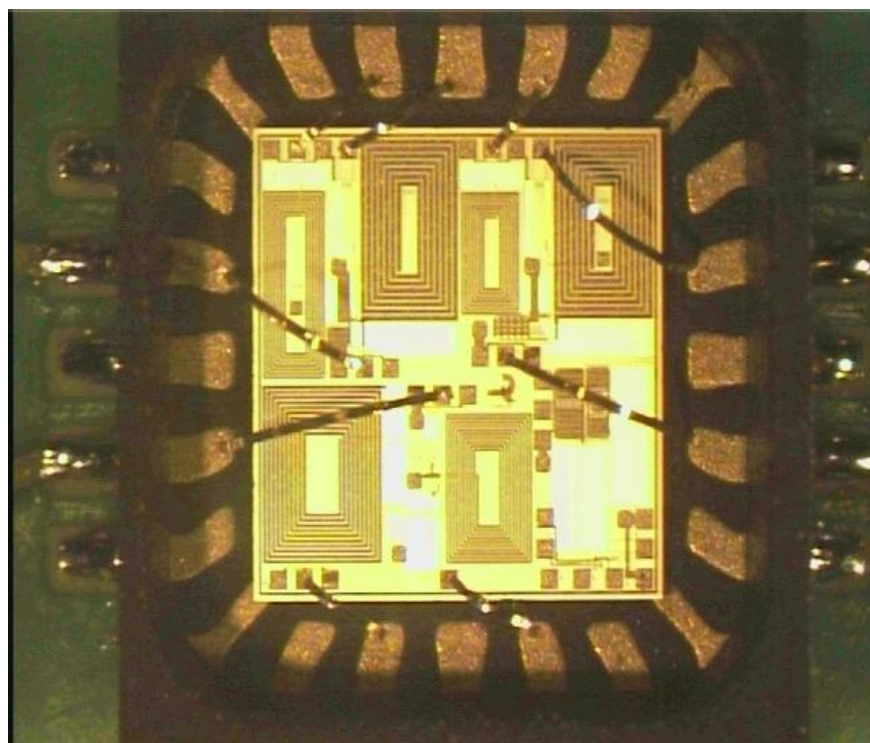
ARL25 assembled in a 4x4mm QFN package.
